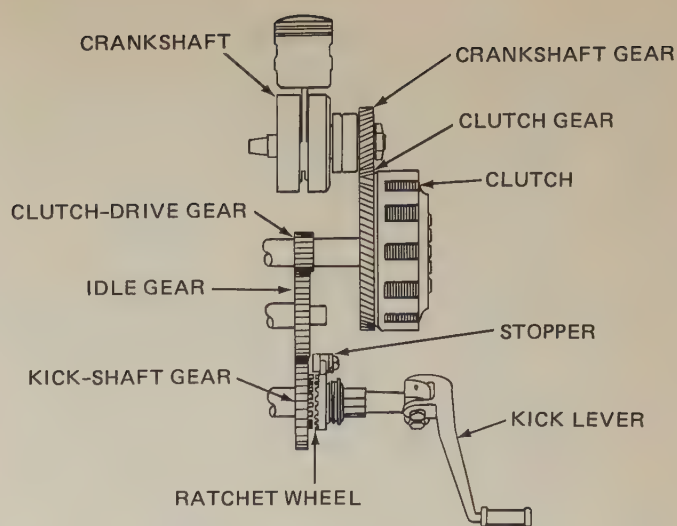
Gear train from kick lever to the crankshaft for a three-cylinder engine. (Suzuki Motor Company)
